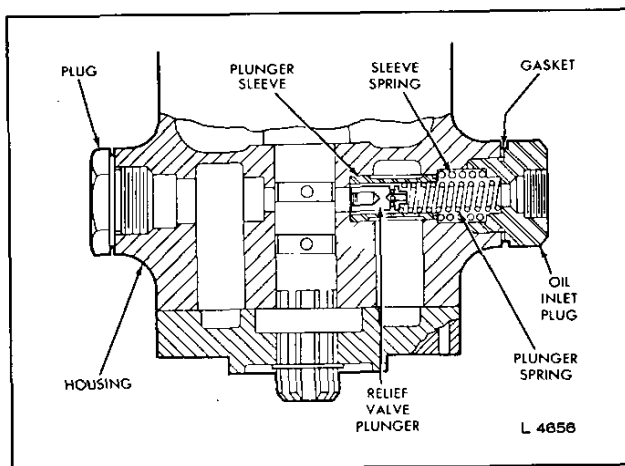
Location of Oil Relief Valve Plunger, Plunger Sleeve, Springs, Oil Inlet Plug and Dummy Plug in Governor Housing (R.H. Governor Shown)
